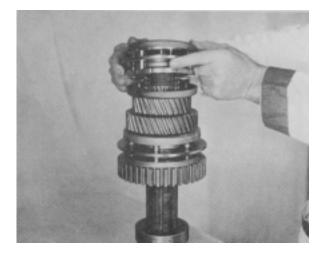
Remove mainshaft 1st & reverse sliding gear. Set mainshaft up as shown and remove 4th & 5th synchronizer assembly. NOTE: Bottom synchronizer cup may stay on mainshaft.
